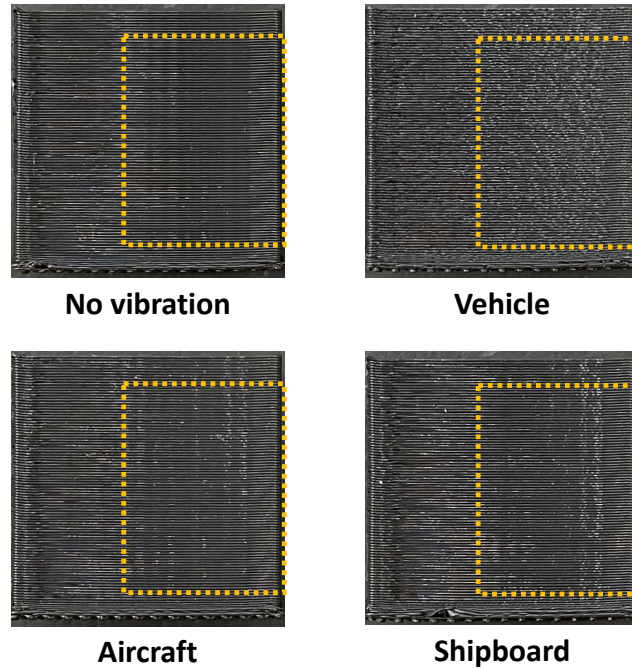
Images of one of the side surfaces of 3D printed samples printed under different conditions.
